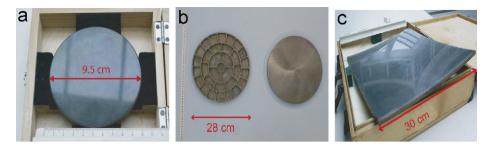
Photographs of the small-sized prototype glass-coated beryllium mirrors: (a) a front view of prototype 1 (flat mirror); (b) the back side with the reinforcing rib structure and the front side (right) view of prototype 2; (c) a front view of prototype 3.
